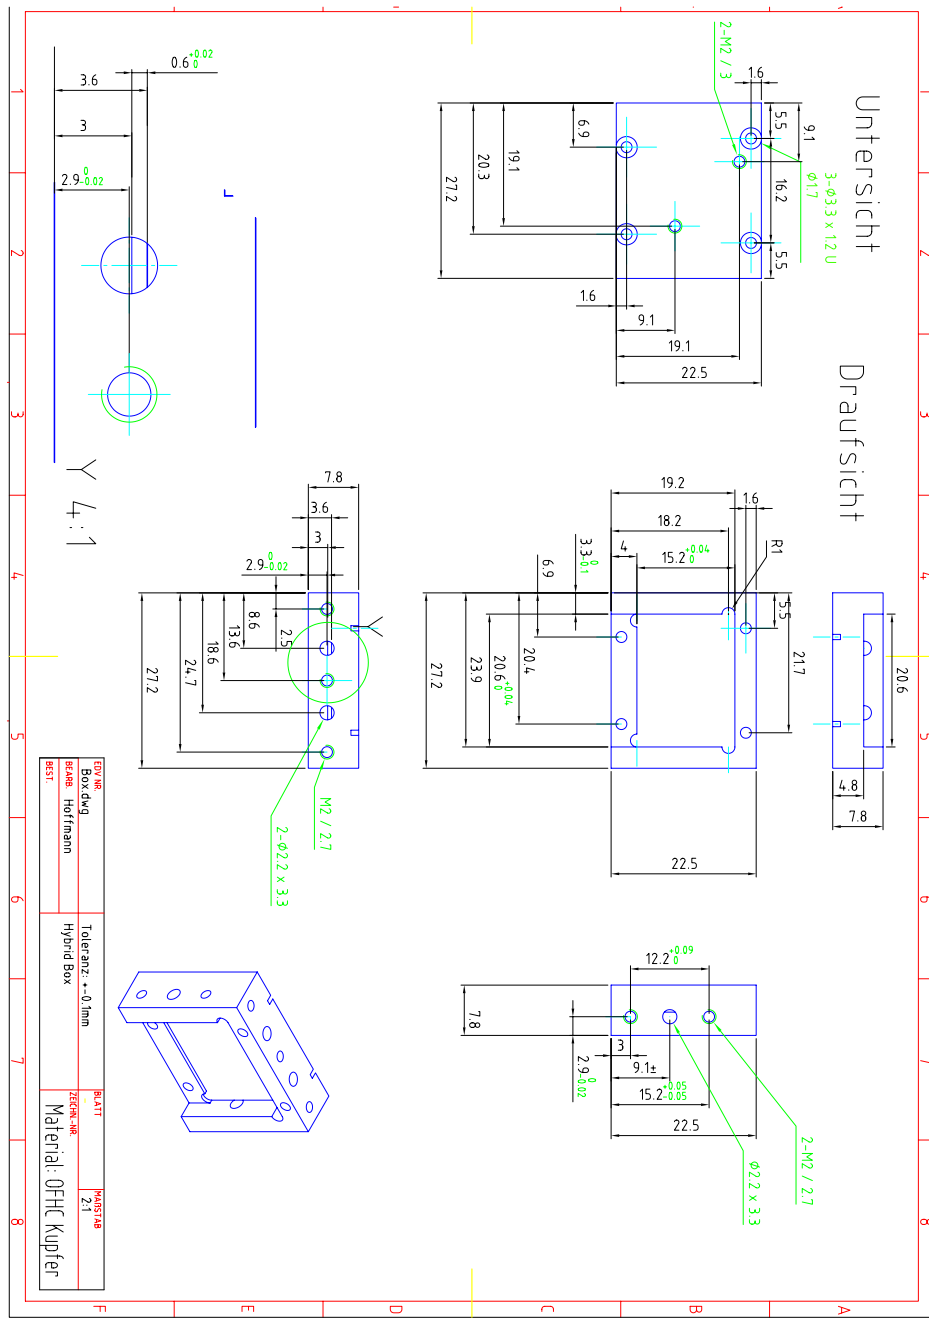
Technical drawing of the measurement box. Dimensions are given in mm
